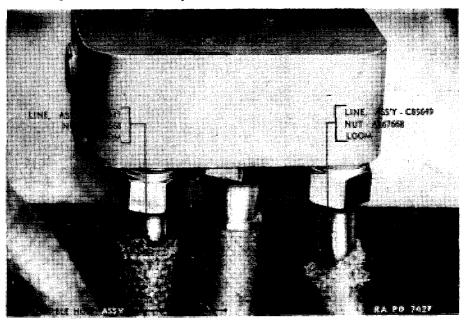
Three-Way Shut-Off Valve—Installed, Rear View
